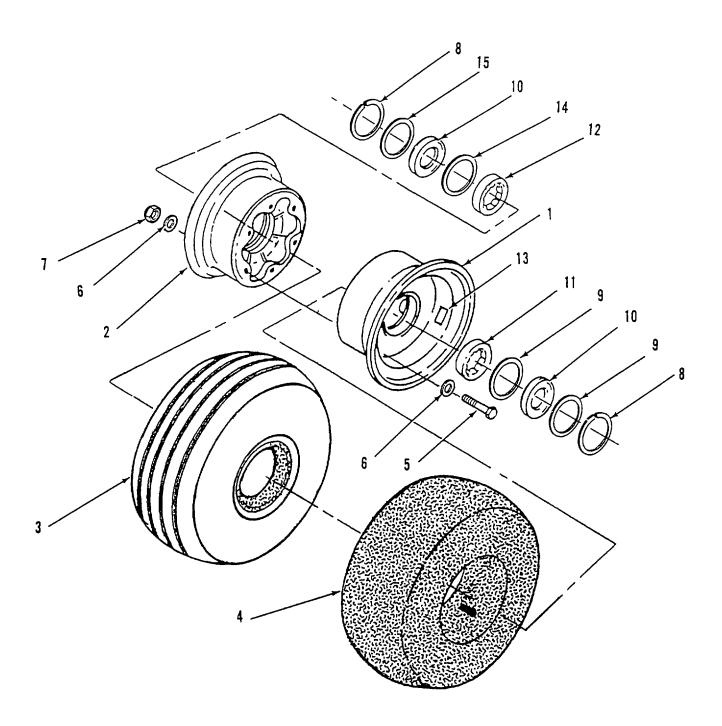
Wheel Assembly, P/N 40-76-1
